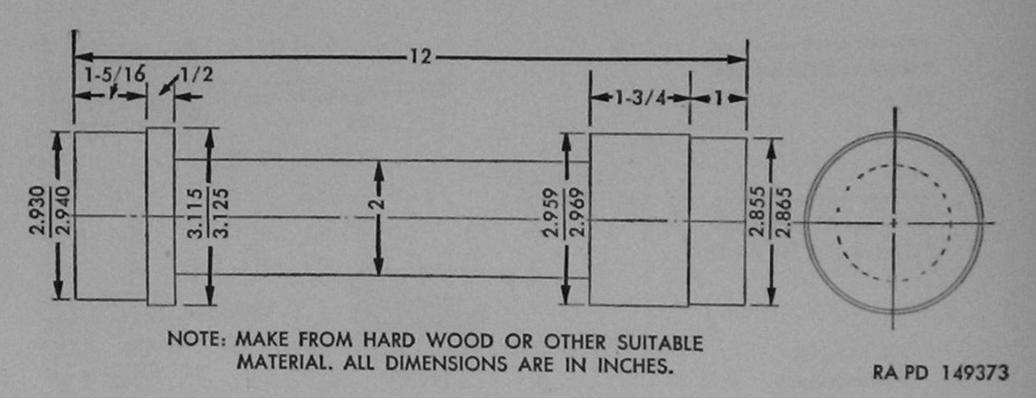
Improvised mandrel for installing crankshaft bearing oil seals.
